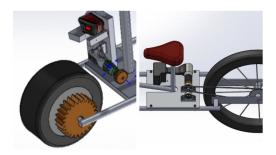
Assembly View of the Initial Drill Position and Assembly of the Final Drill Position with Pillow Blocks. Previous concerns with the drive train included the misalignment of the gear and sprocket, the positioning of the drill, and the number of teeth chosen for the gear on the rear wheel being non-existent.
